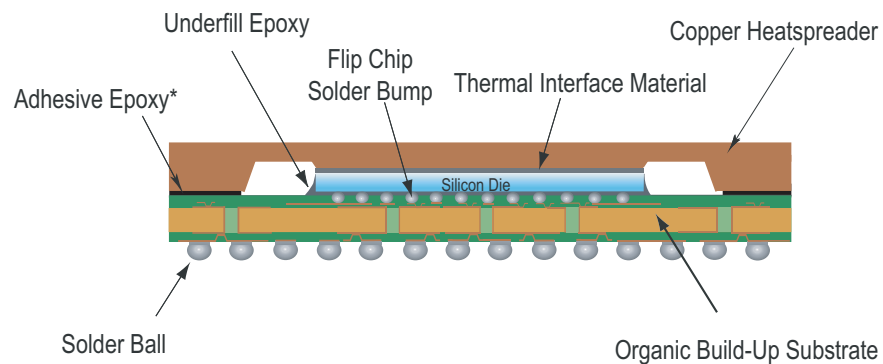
Flip-Chip BGA Package with Type I Lid
